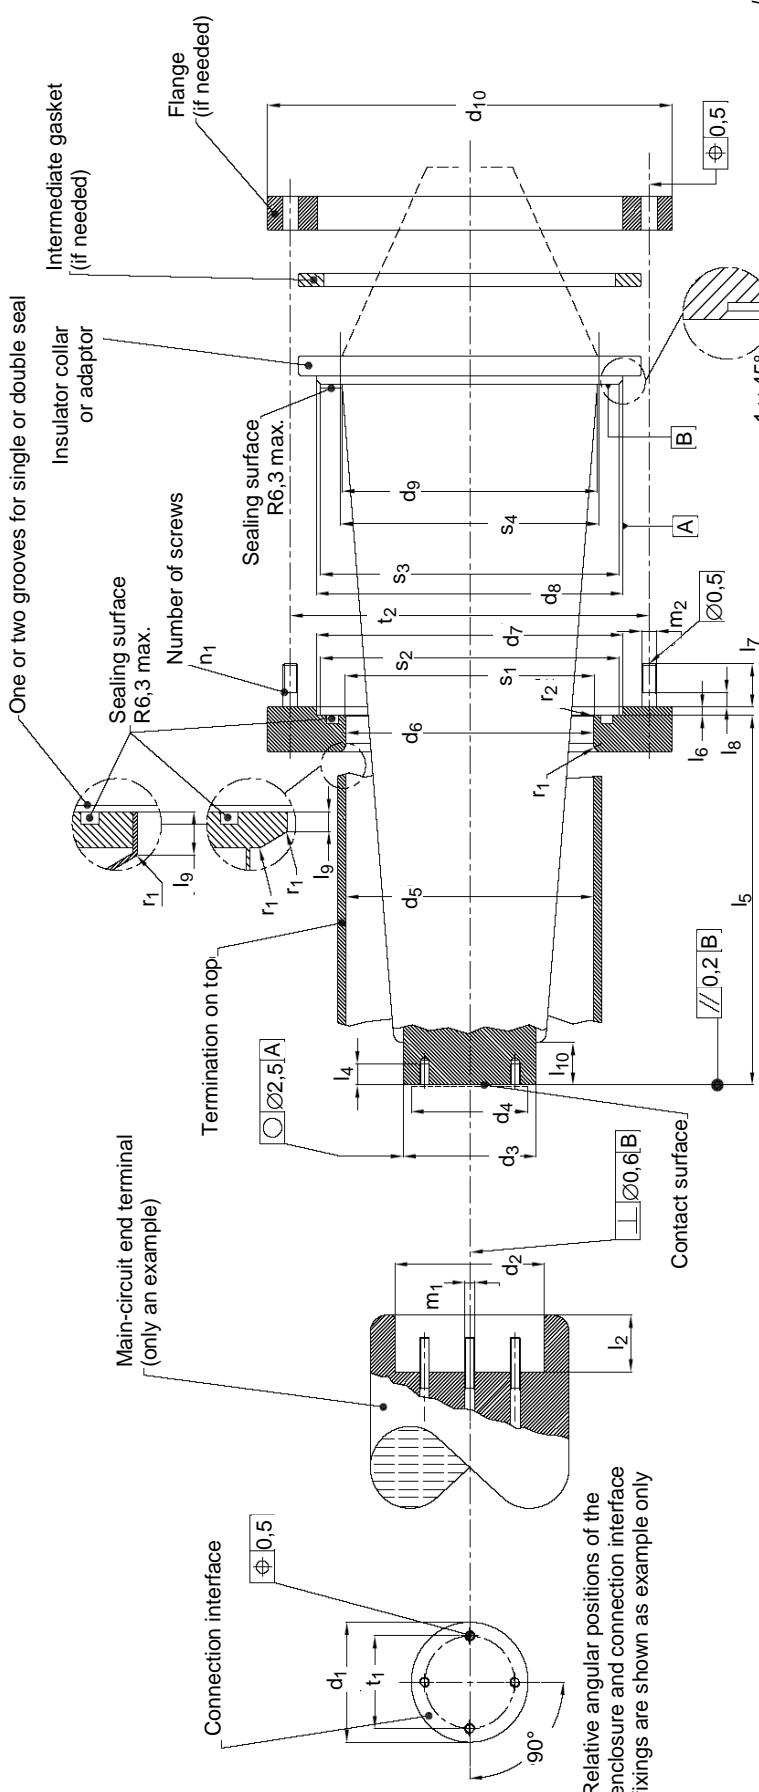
Dry-type cable connection assembly – Typical arrangement
